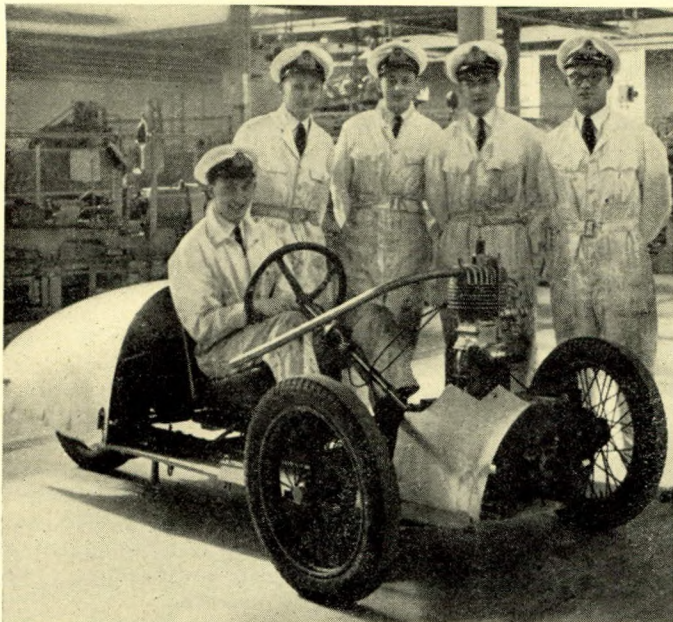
AN EXAMPLE OF "DESIGN AND MAKE" TEST WORK. A 250 C.C. AIR-COOLED ENGINE MOUNTED IN A TEST VEHICLE
